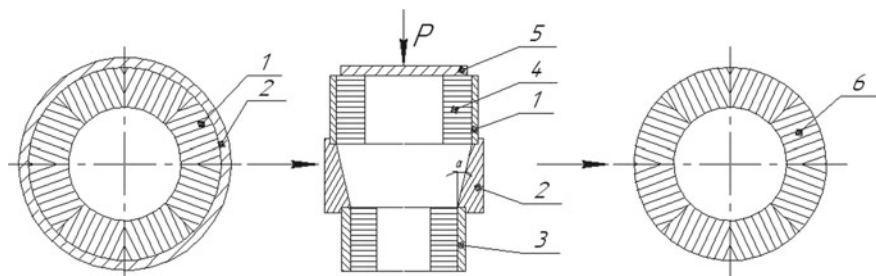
Production of the bearing from segments. 1—segments; 2—false yoke; 3—cone; 4—the final yoke; 5—punch; 6—finished bearing
